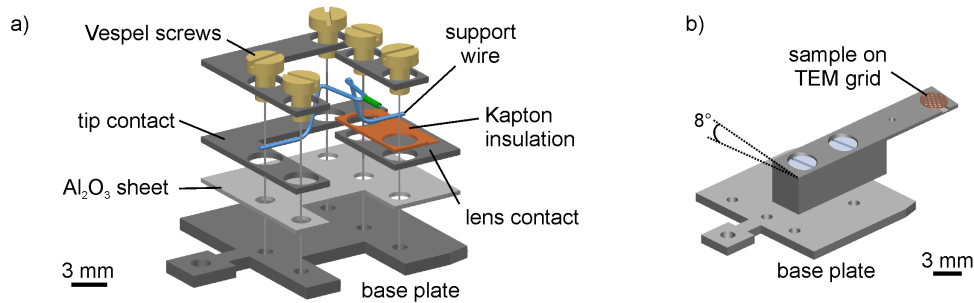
(a) Exploded drawing of the holder for the electron gun. (b) Drawing of the sample holder.
